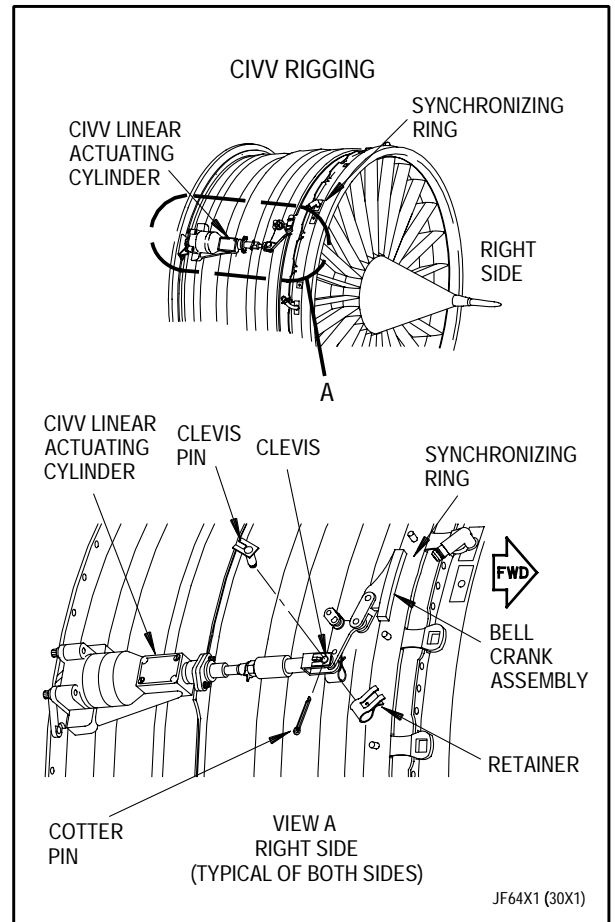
Compressor Inlet Variable Vane System - Rigging Pin Installation (Sheet 1 of 2)
